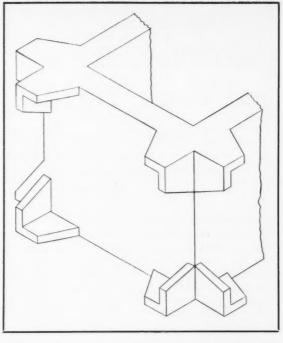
Drawing showing method of providing supports on a cast iron three-way drilling jig.
